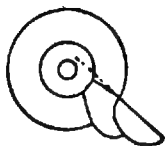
Side Elevation of Wheel with One Cup in Position
